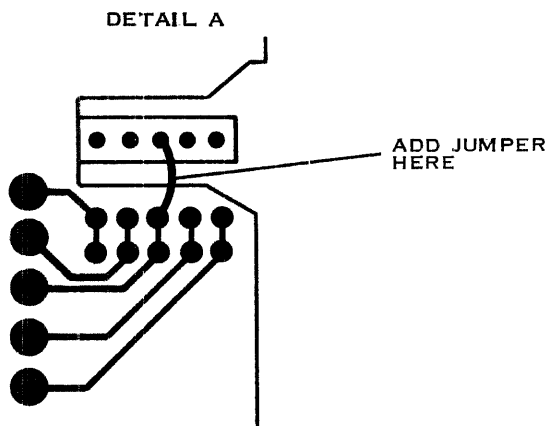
Installation of Jumper Wire on Toroid Coil PWB, LQ45 Printer
